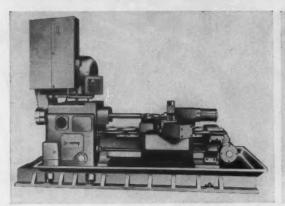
Tracer type, fully-automatic Lo-Swing lathe for machining shafts in small and medium size lots.
